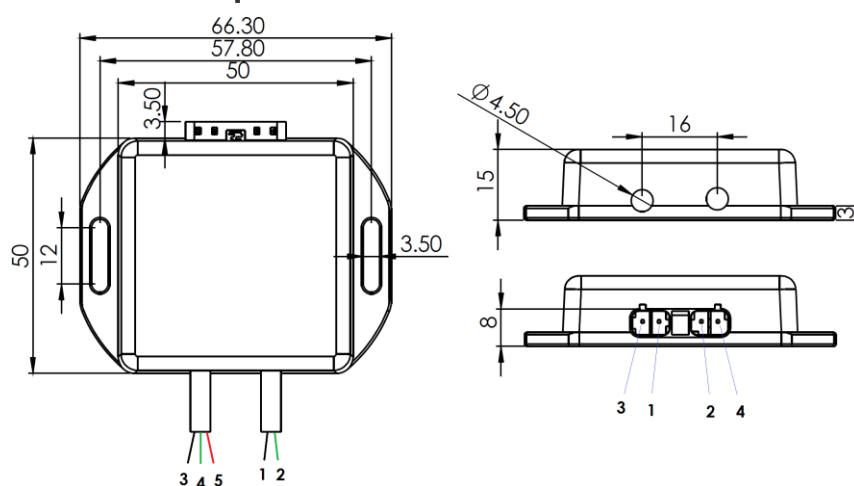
EMUS G1 CAN Cell Group Module (CGM020A) mechanical drawing. All dimensions in millimeters
